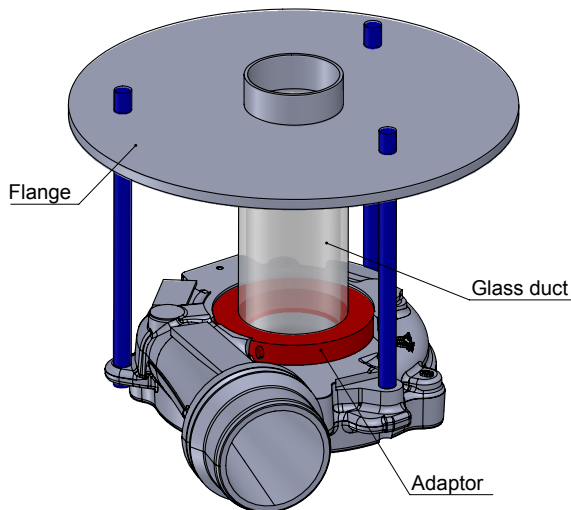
CAD view of the proposed installation for PIV measurements, showing the adaptor piece, the glass tube and the mounting flange.
